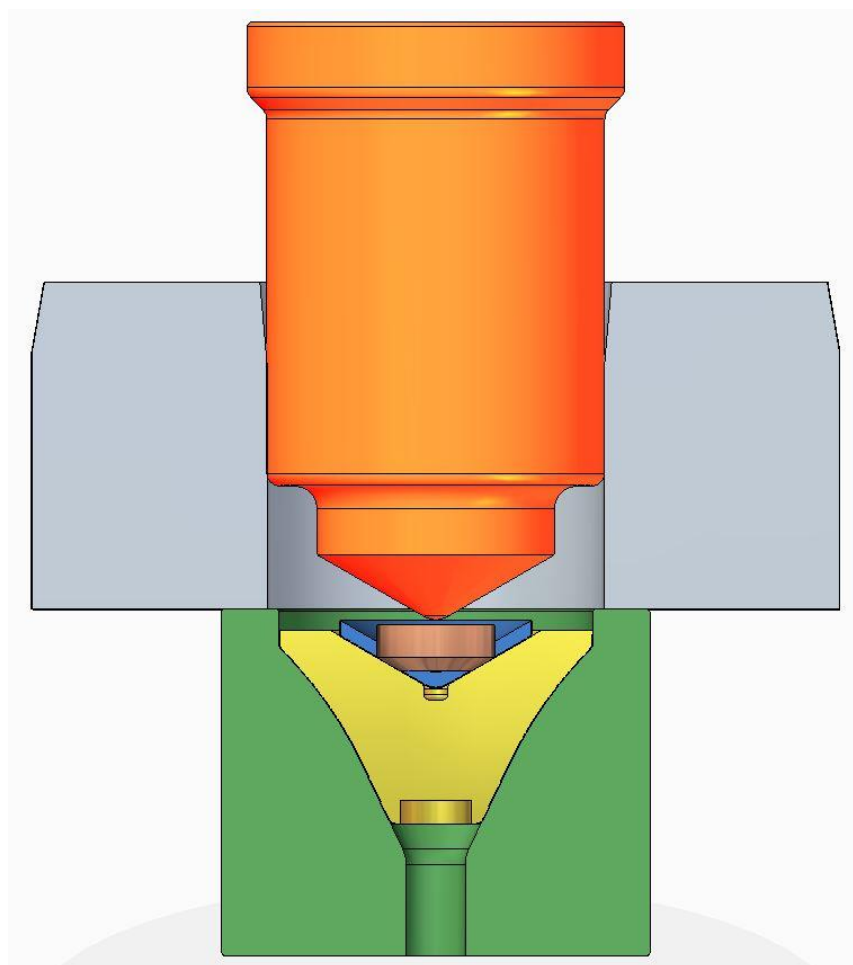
Forge tooling layout for manufacturing the 120° liner, before forging.
